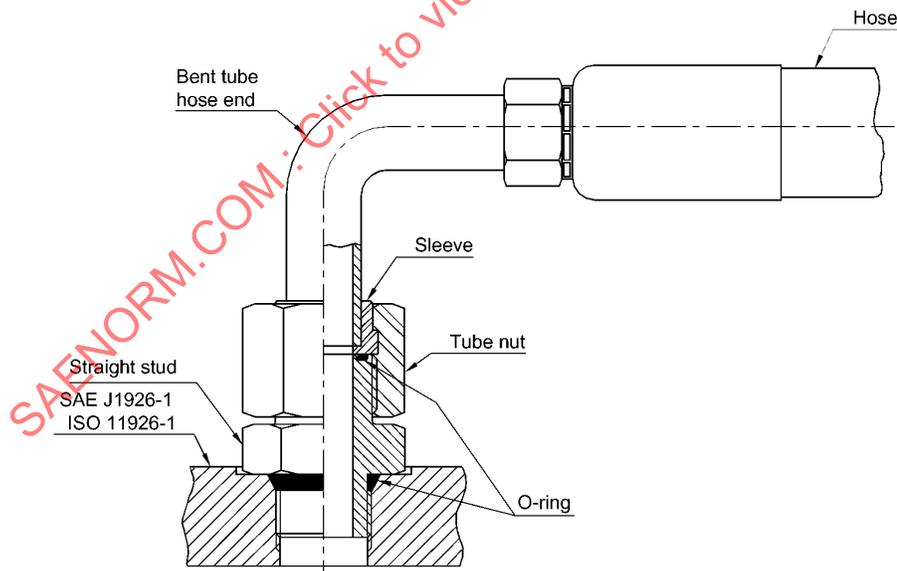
TYPICAL CONNECTION NONADJUSTABLE CONNECTOR TO HYDRAULIC HOSE
